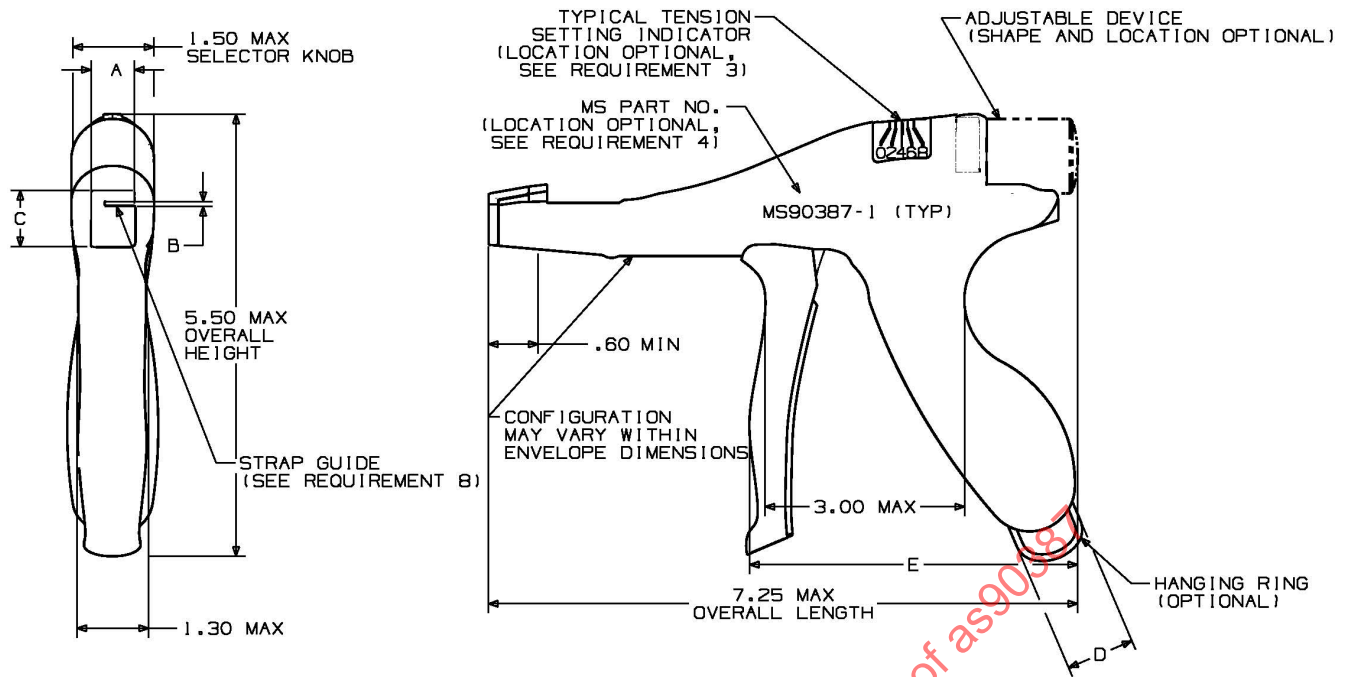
MS90387 ERGONOMIC TOOL DIMENSIONS AND CONFIGURATION (SEE DESIGN REQUIREMENTS)
